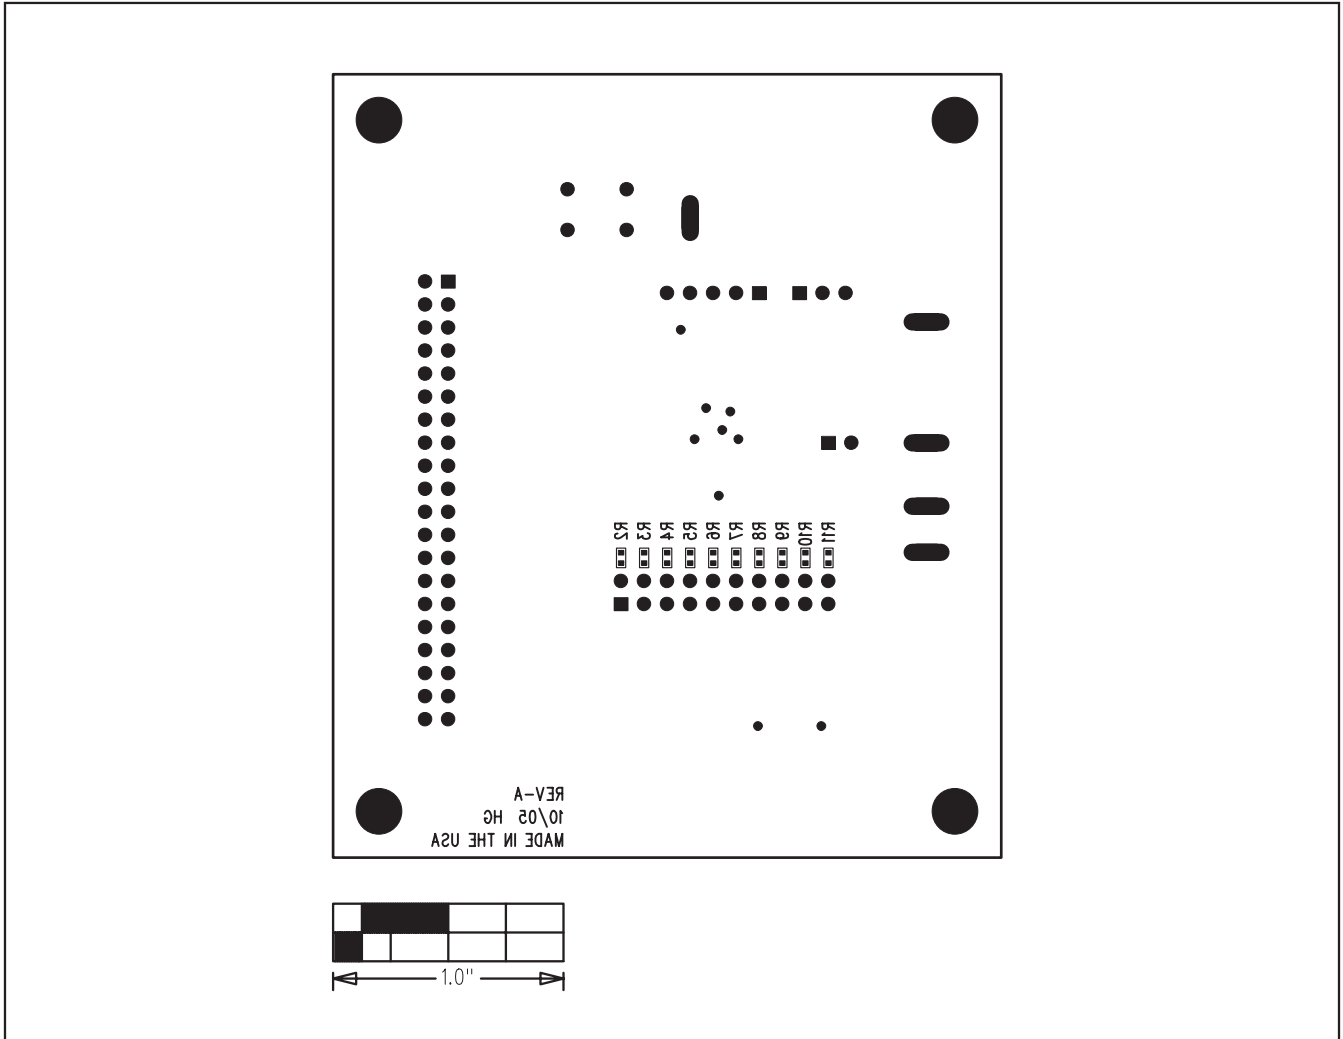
MAX6966 EV Kit Component Placement Guide—Solder Side
